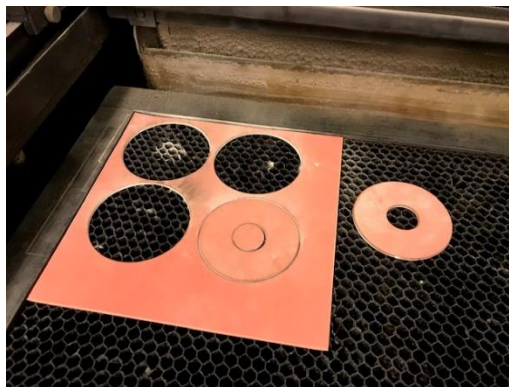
Example of poppet seals cut using the ME machine shop laser cutter
